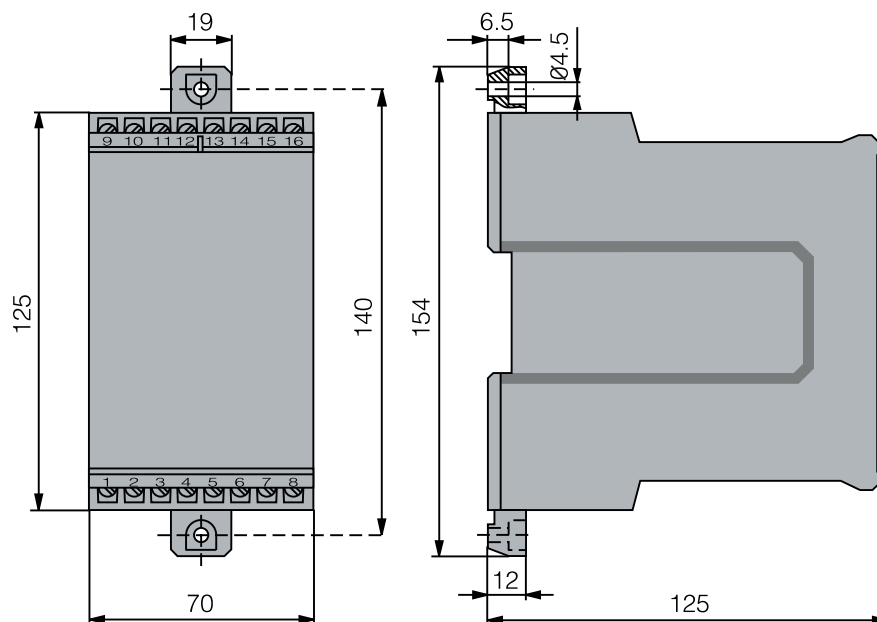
Transducer with the screw hole brackets pulled out for wall mounting
